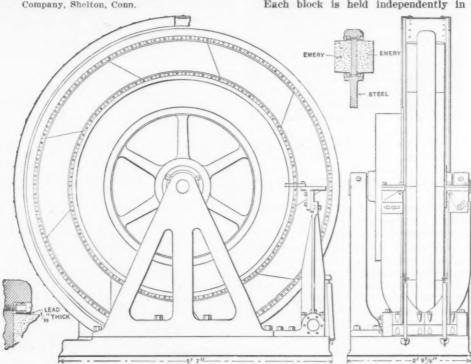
End and Side Elevations of the Machine and Details of the Fastening of the Emery Blocks.
